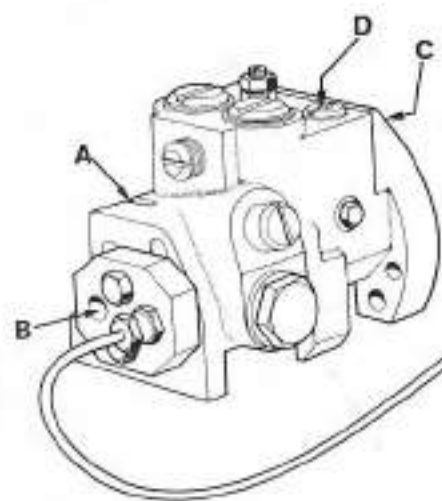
View showing adapter connecting pressure line to control valve assembly. Very slight leakage from valve openings is normal. If excessive leakage shows at any of the openings (A, B, C, or D), refer to text for location of faulty valve.
